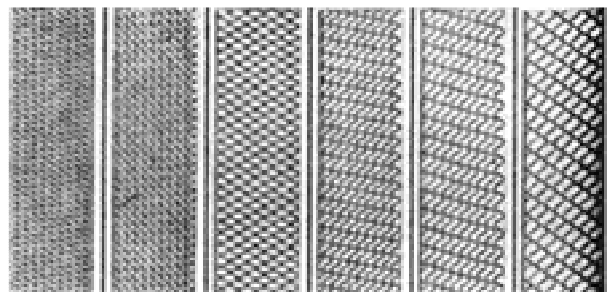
Aesthetic surfaces obtained by vibro-rolling on outer cylindrical surfaces
